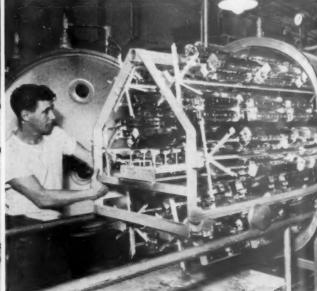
Vacuum metalizing chamber where plastic locomotive and car bodies receive a brightmetal coating. When the chamber is evacuated, heat melts fine aluminum wire which flash coats the cars on rapidly revolving fixtures in the chamber.
